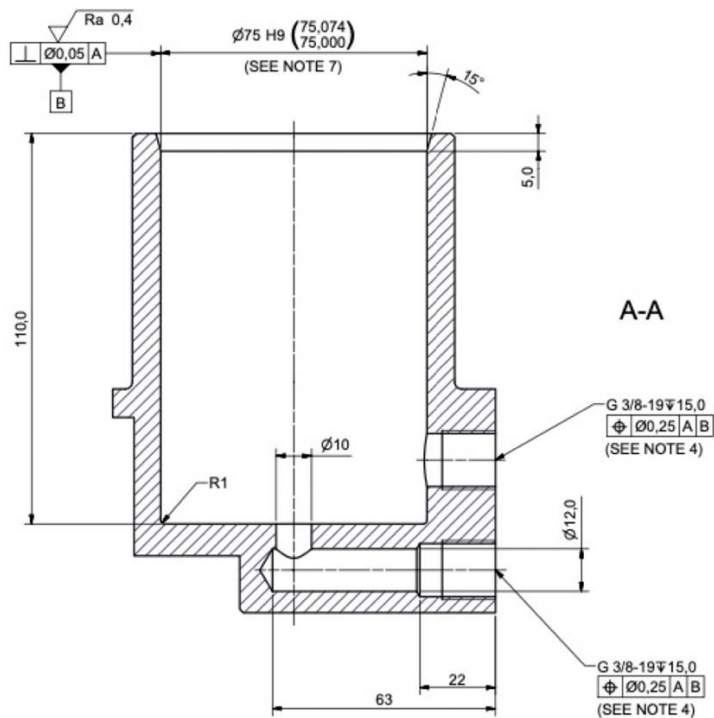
Section of 'Sub Assembly of Expansion Cylinder' technical drawing produced by the University of Southampton EDMC for this project. Section highlights the pump outlet being aided by gravity via connection to the bottom surface of the cylinder bore. See full drawing for note details, signposted in Chapter 9.
